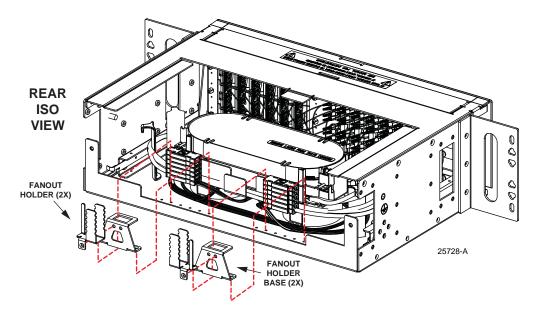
Removing Fanout Holders (3RU and 4RU Panel)
